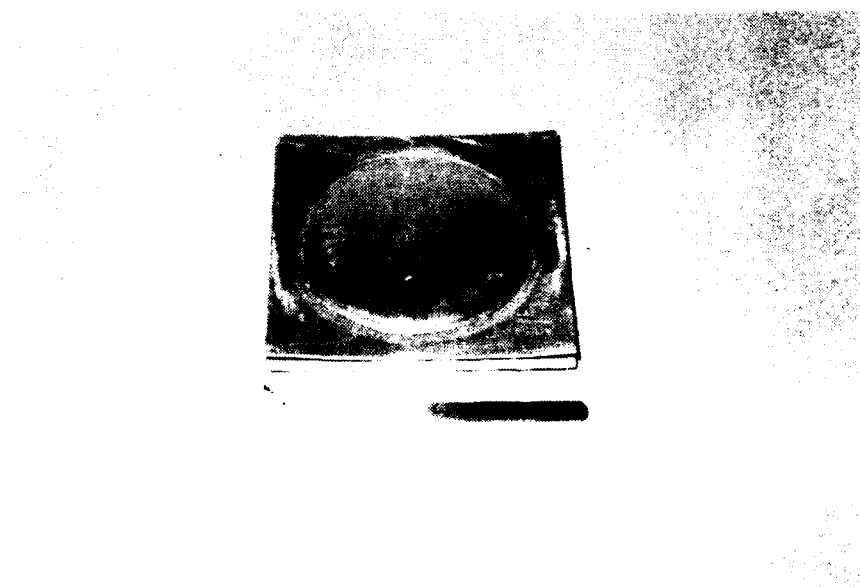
Circular explosive patch weld on 0.025 in.-thick 6061-T6 aluminum base plate.
